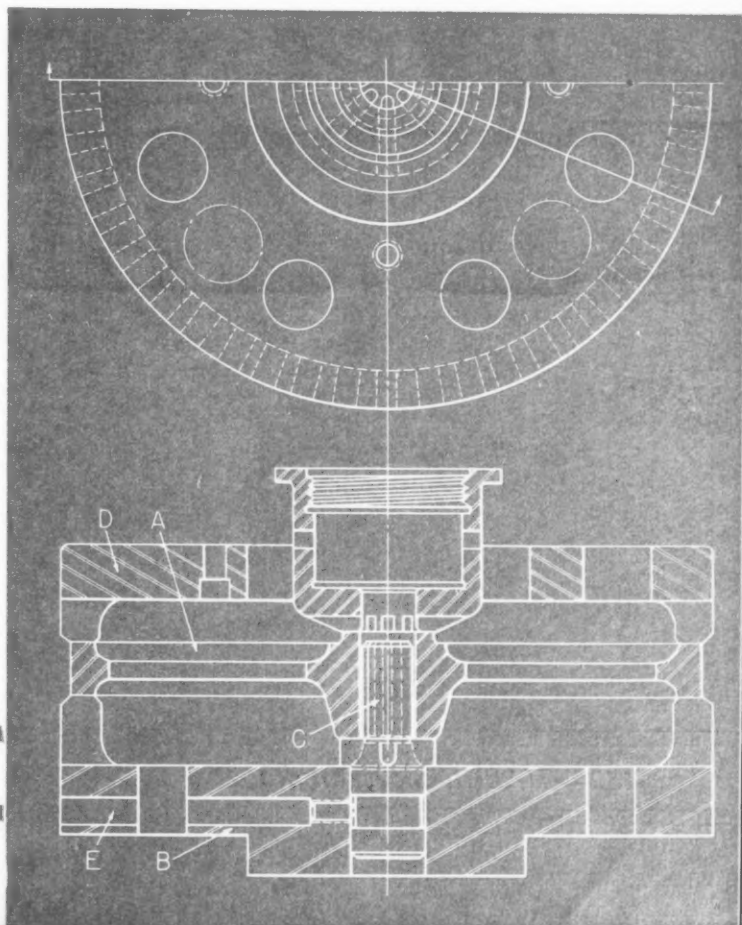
(Below Right) Die employed for holding heated gear A during quenching to prevent distortion. Oil flows upward through hollow plug C to quench both sides of the gear simultaneously
